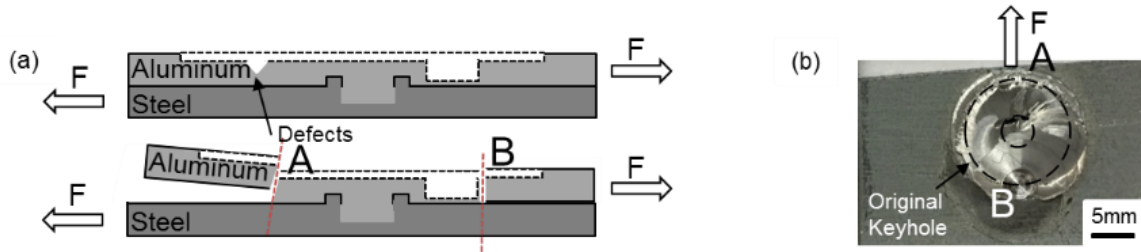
(a) Schematic illustration of the failure (b) Top view of the failure on steel side
